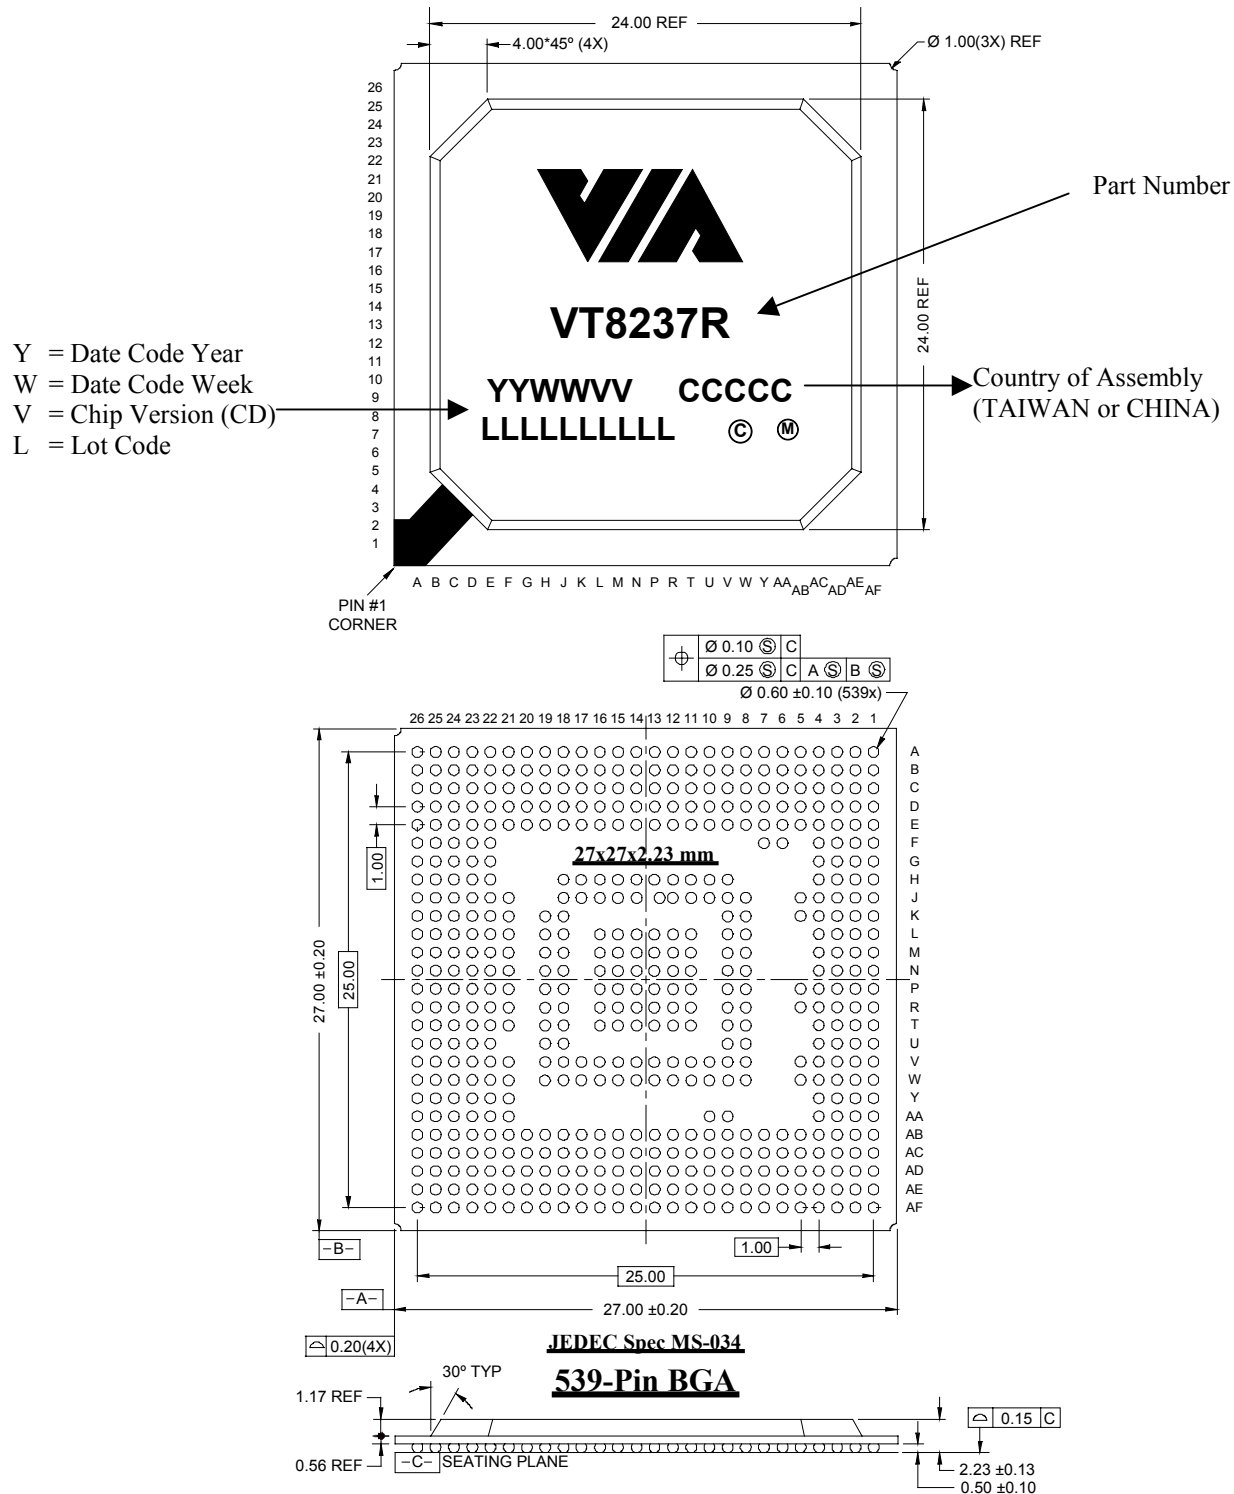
Mechanical Specifications – 539 Pin Ball Grid Array Package
